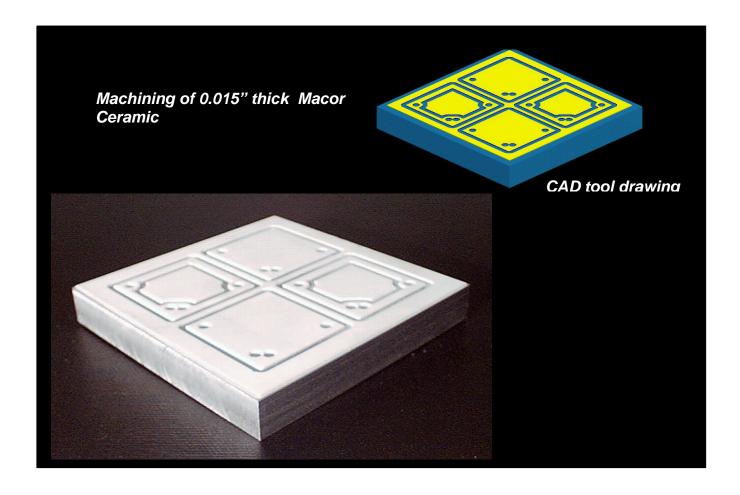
Machine tool drawing shown next to fully machined ceramic sheets.
